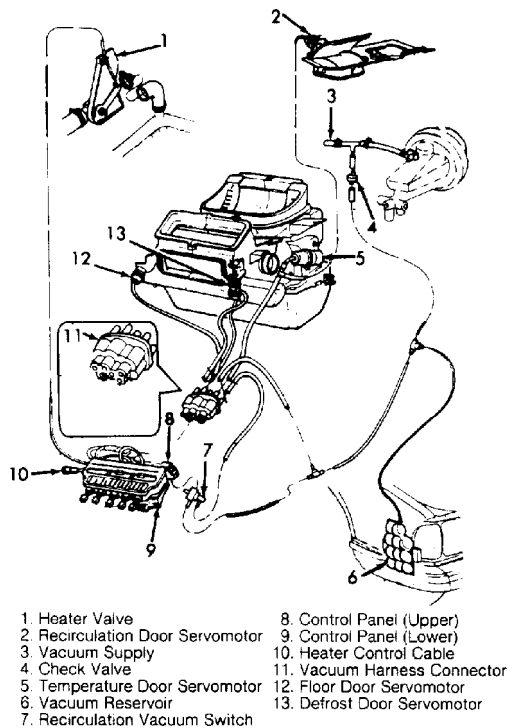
Exploded View of A/C-Heater System Components (Fox)
